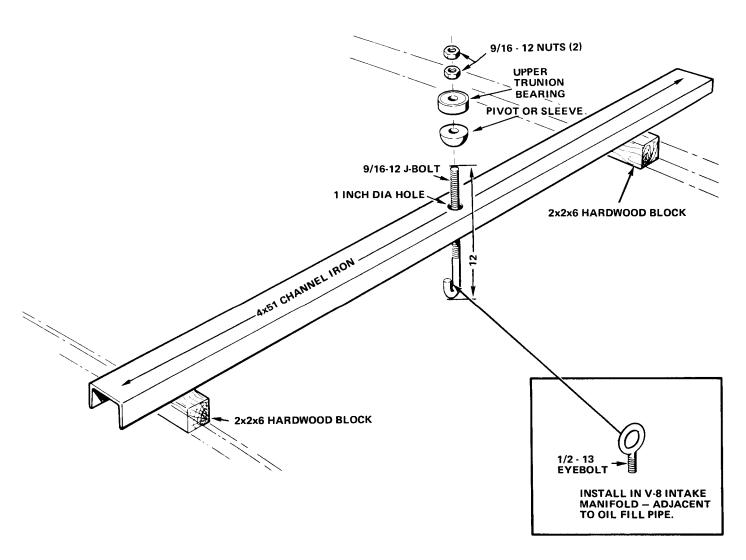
B-7 Typical Engine Mounting-V-8 Engine
